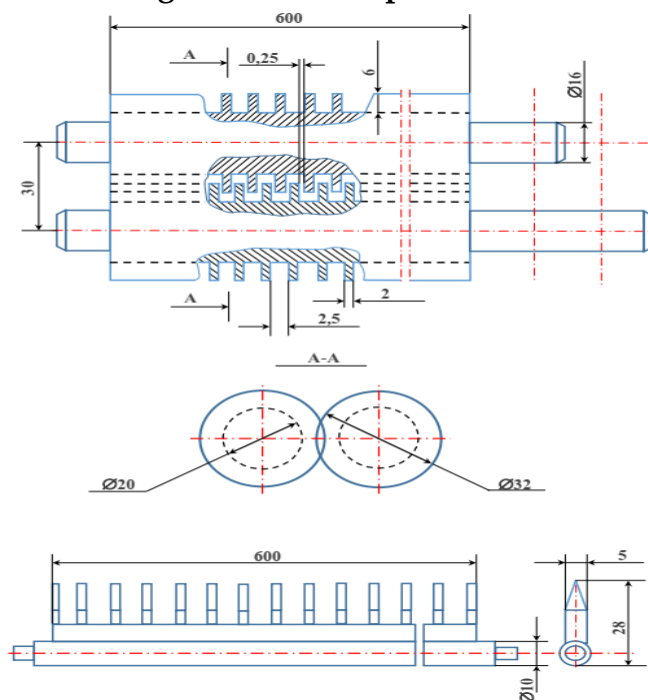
Cross-section and engagement position of a pair of cylinders with a working pair of cylinders, an element of the working comb of a pneumatic mechanical gin
